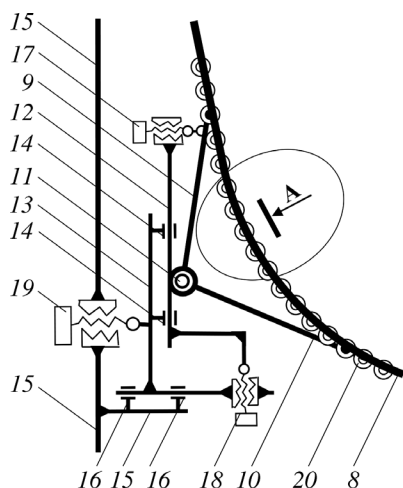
View of the guiding device of a conveyor: 8 – guide device profile; 9, 10 – levers; 11 – hinge; 12 – tripod; 13 – carriage; 14 – height guiding mechanism; 15 – conveyor frame; 16 – inclination guiding mechanism; 17, 18 – regulating inclination
